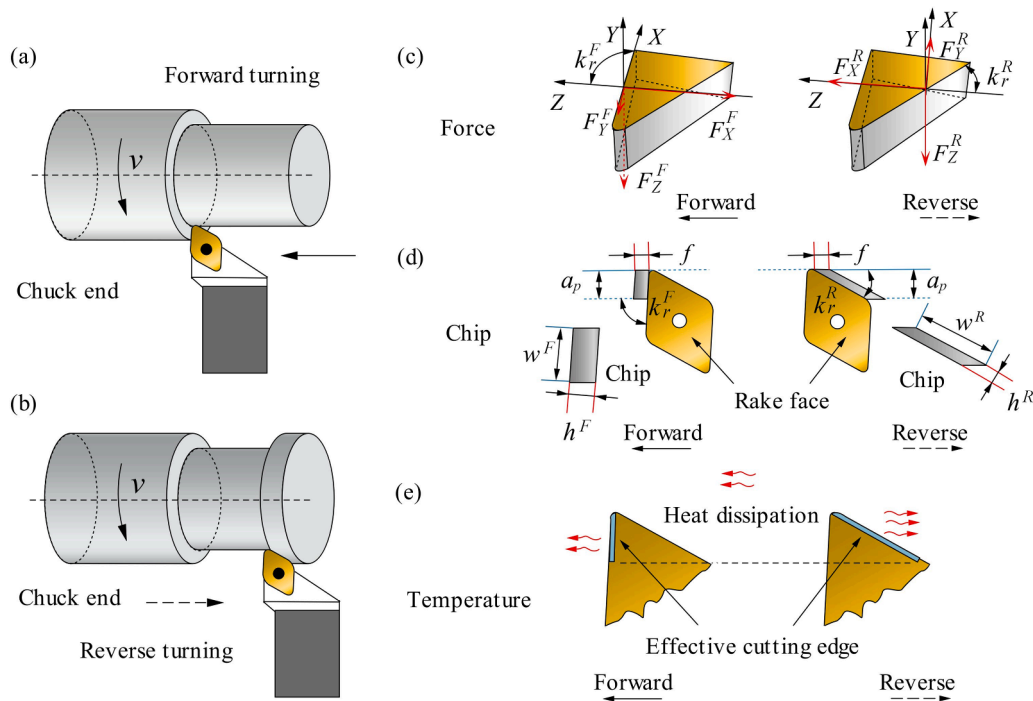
Schematics of the MDC machining fundamentals. (a) Direction of MDT forward turning facing the chuck; (b) direction of the MDT reverse turning away from the chuck. The MDT forward turning uses the tool cutting edge angle for machining while reverse turning uses the end cutting edge angle. Differences in (c) triaxial force, (d) chip morphology and (e) heat dissipation between forward turning and reverse turning, caused by variety of cutting tool angles.
